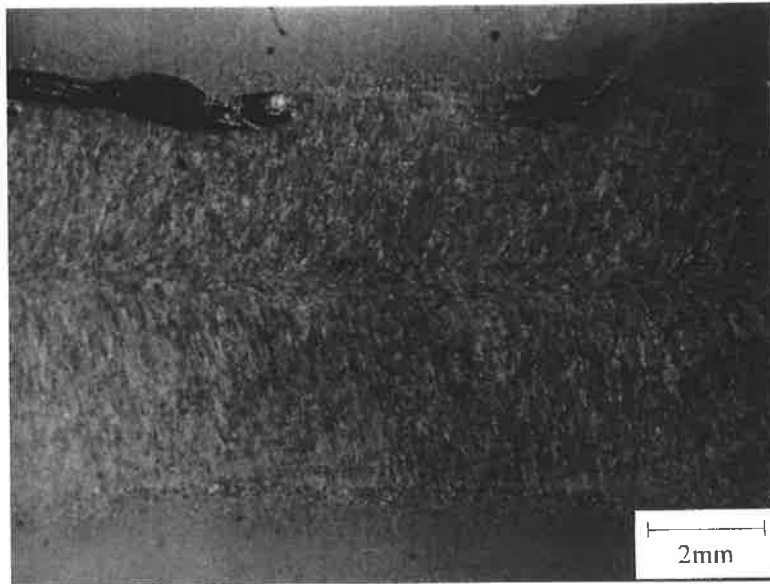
Longitudinal horizontal section of a weld made at 550mm/min and 184A (heat input equal to 0.55kJ/mm). In this weld the total number of hollow bead is 6 and the total length is 26mm.
